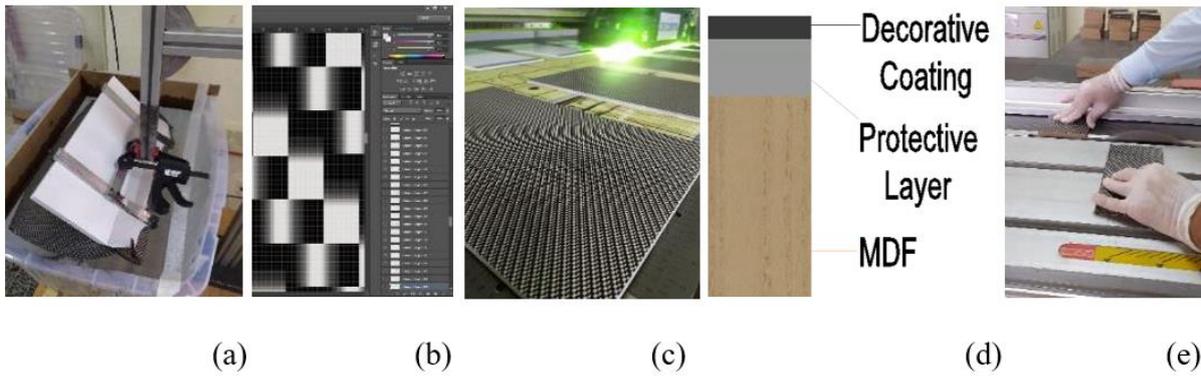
(a) Water Transfer Printing, (b) Motif design, (c) Ultra Violet printing, (d) Surface layer of samples, (e) Cutting of samples.
